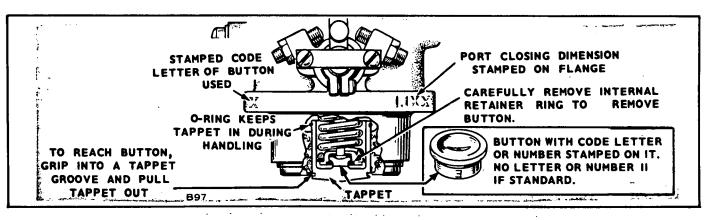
INJECTION PUMP BUTTON INSTALLATION
